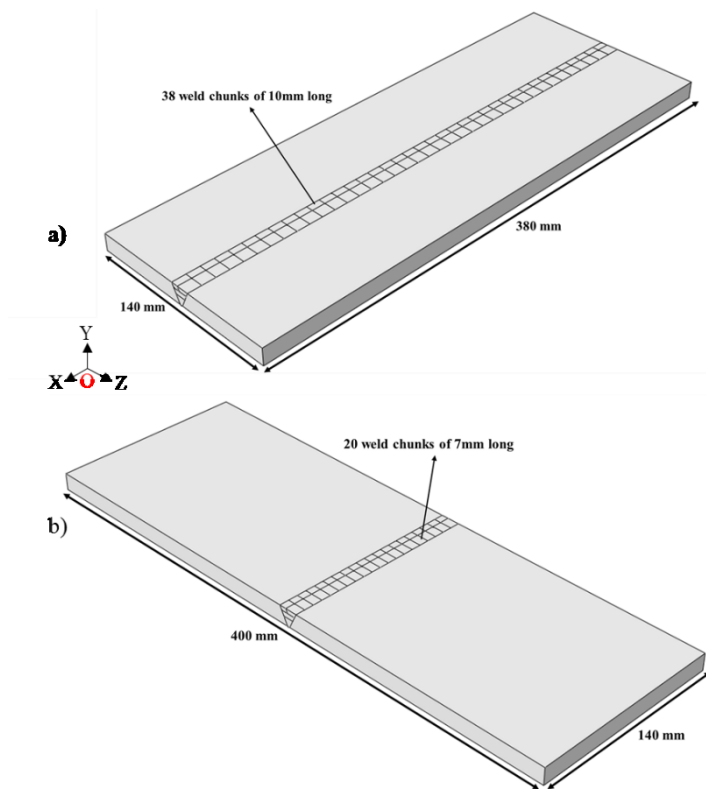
Butt weld model geometry used in weld simulations: a) Plate with the long weld, and b) plate with the short weld.
